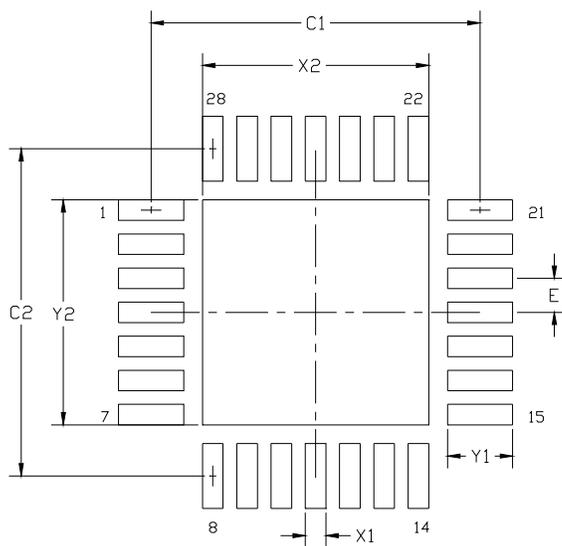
QFN-28 Recommended PCB Land Pattern
